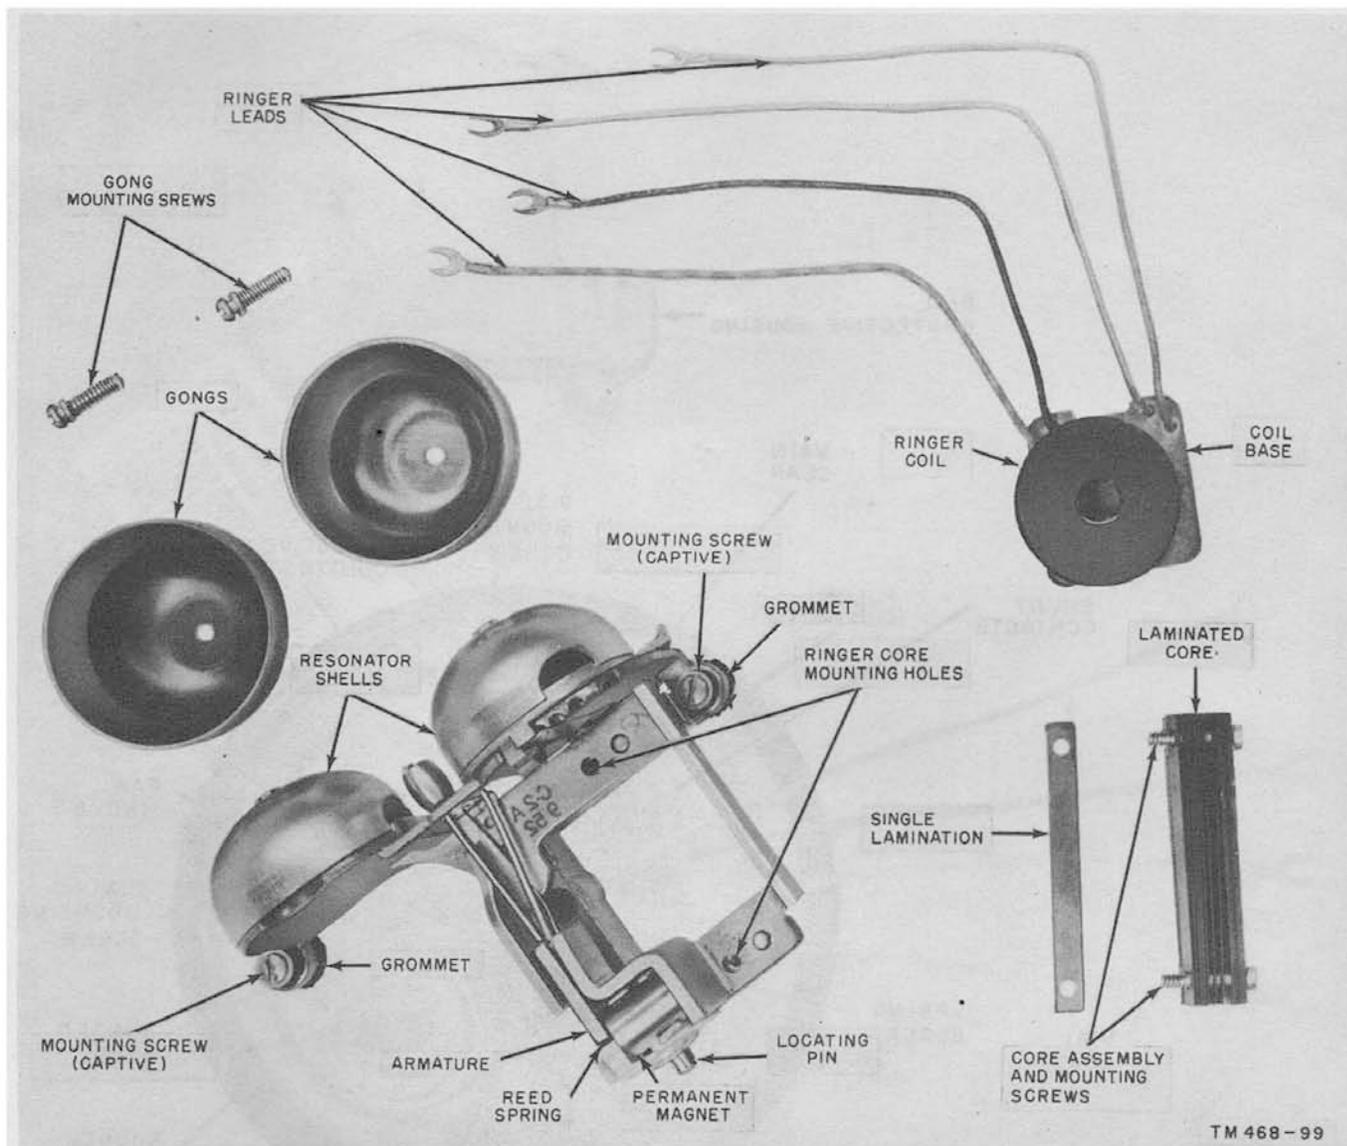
Ringer for Telephone Set TA-236/FT, exploded view.
